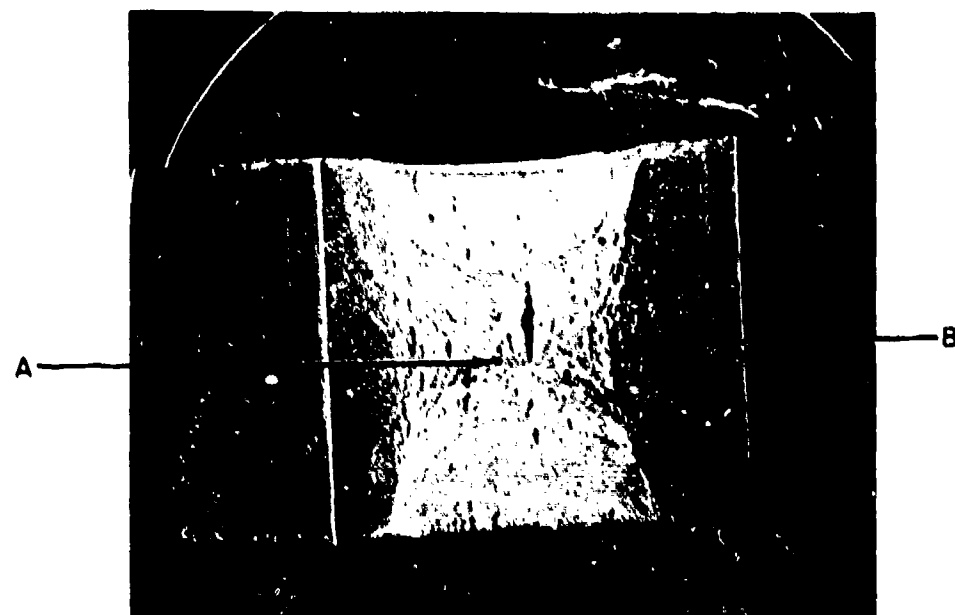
Fracture surface of an HY-130 fatigue specimen, 10x.
